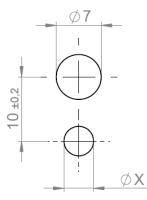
Distance between drill holes in support structure (substructure) for hanger clamp
